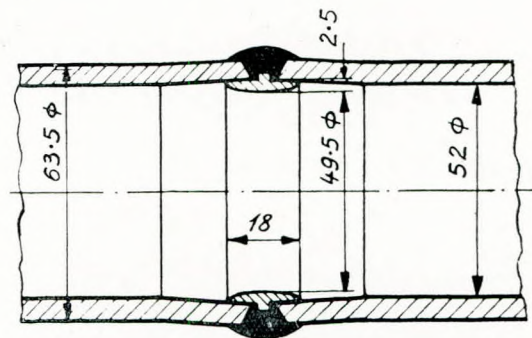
Welded tube joint used in construction of "Monotube" boiler.
